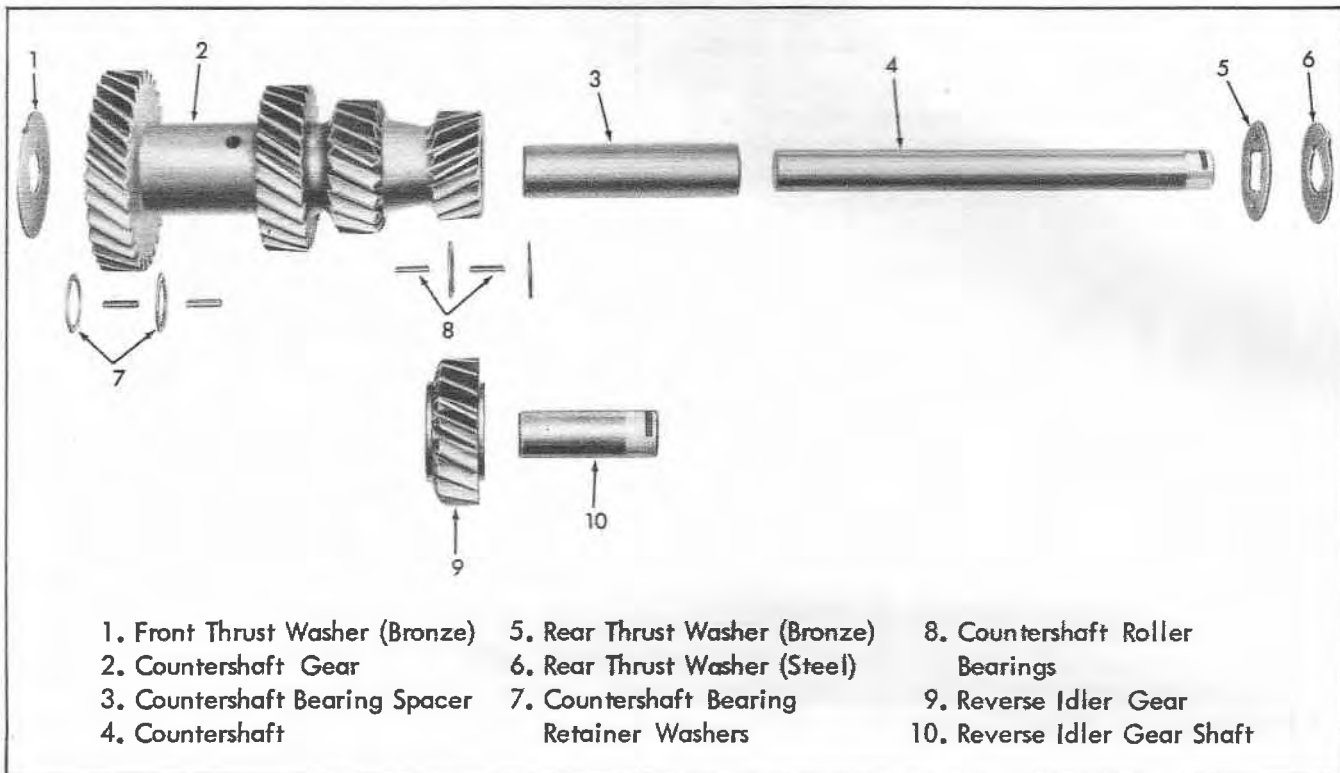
Countershaft Gear Exploded View With Reverse Idler Gear and Shaft
